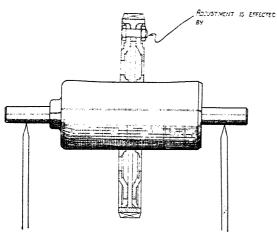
Showing mandrel and knife edges for checking static balance of intermediate gear.
